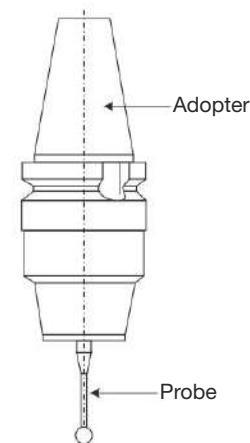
Touch-trigger probe used for inspection on a CNC machine tool
